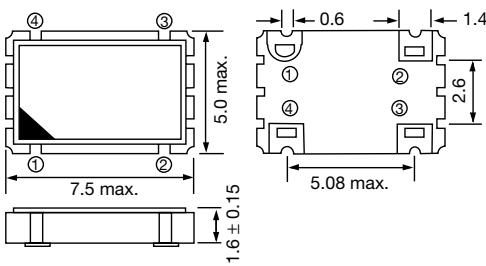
ECS-3955M Series Top, Side and Bottom Views
